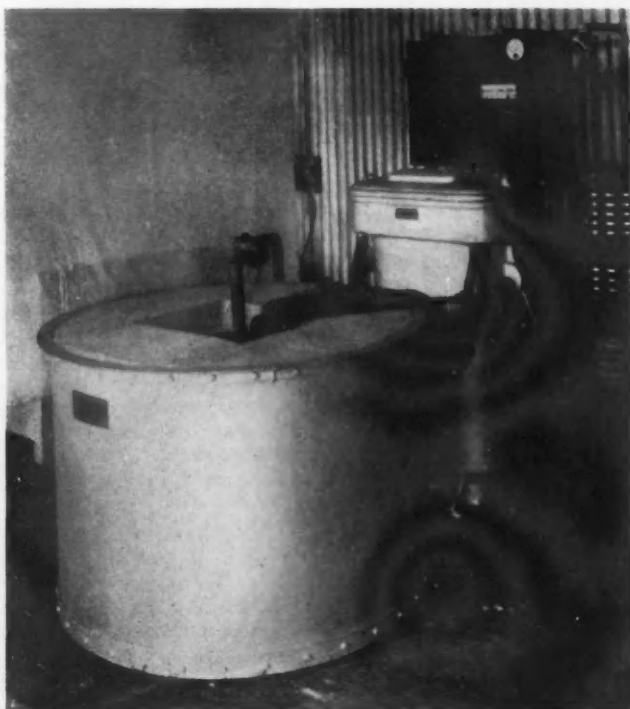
This shows the liquid bath furnace used for heat-treating the stainless steel shanks
